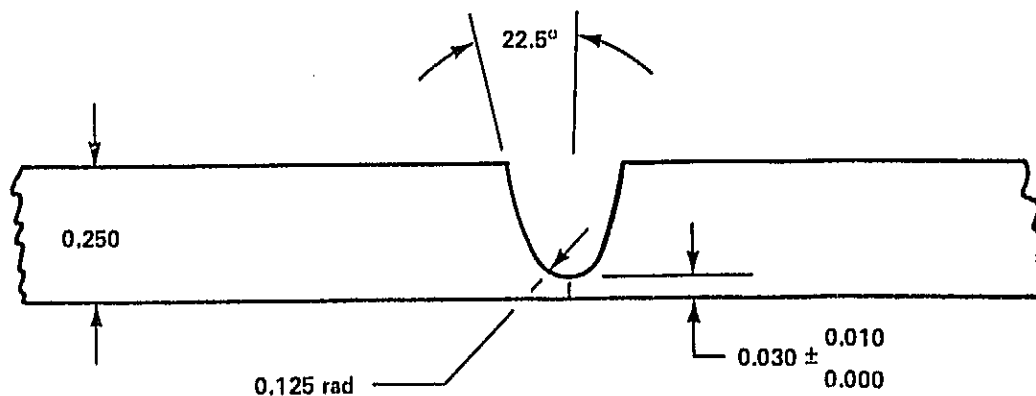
Joint design for 0.250 in. thick alloy 718 crater crack study.
